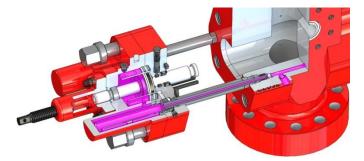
Closed (No Bonnent Bolts) – Open Bonnet for Inspection
